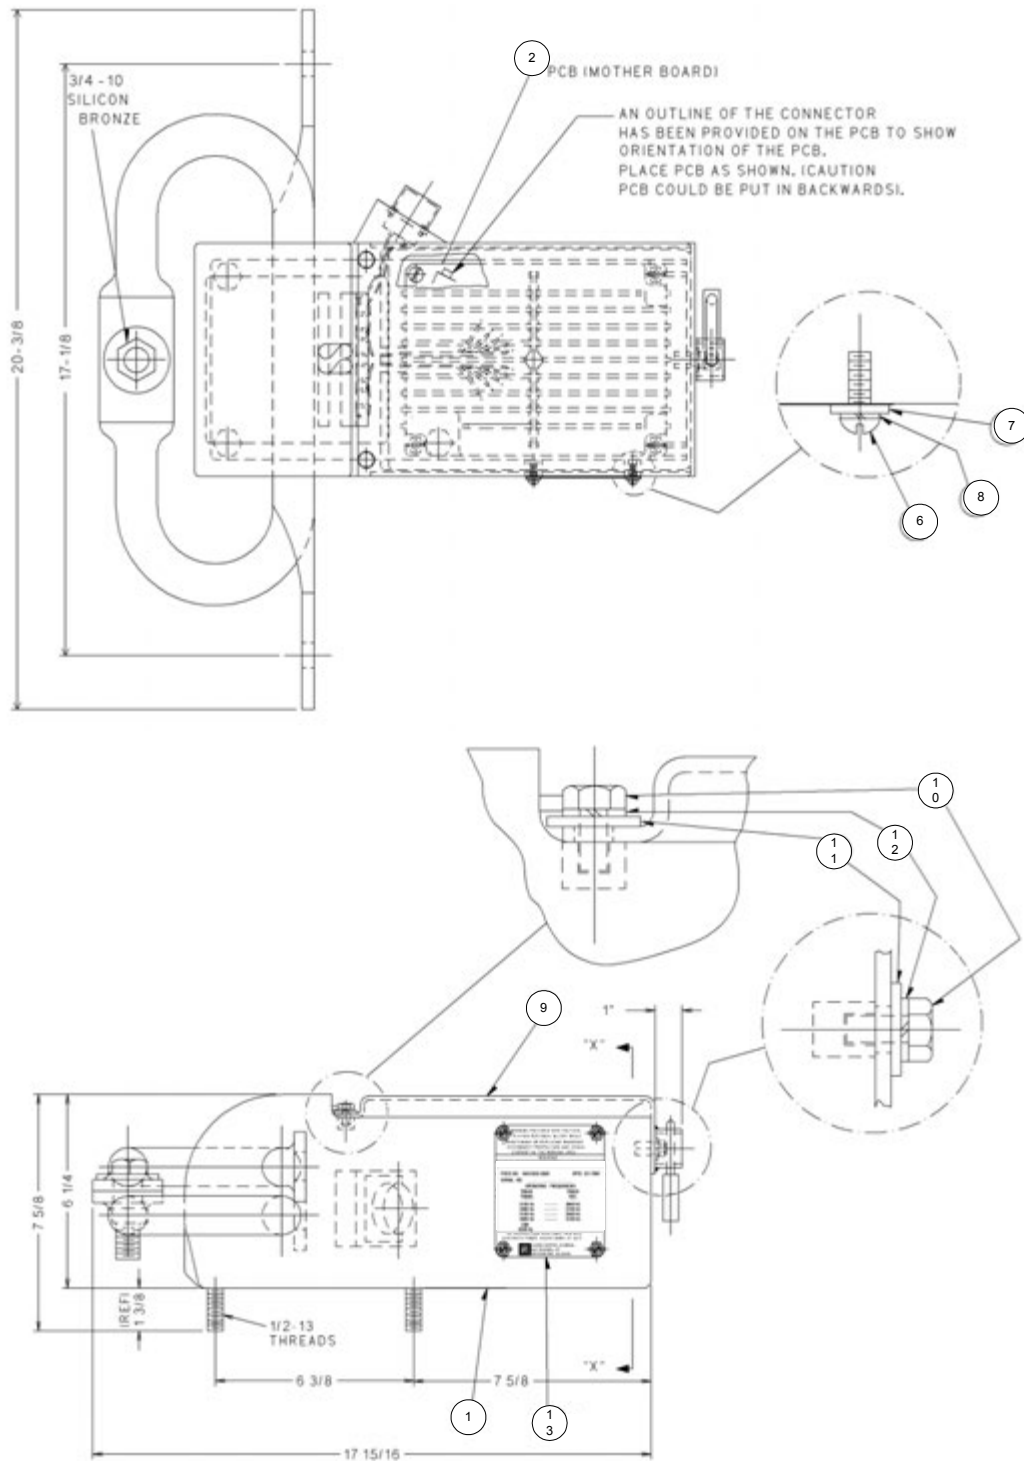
Part Location Diagram Tuned Minibond Assembly (Sheet 1 of 2)
